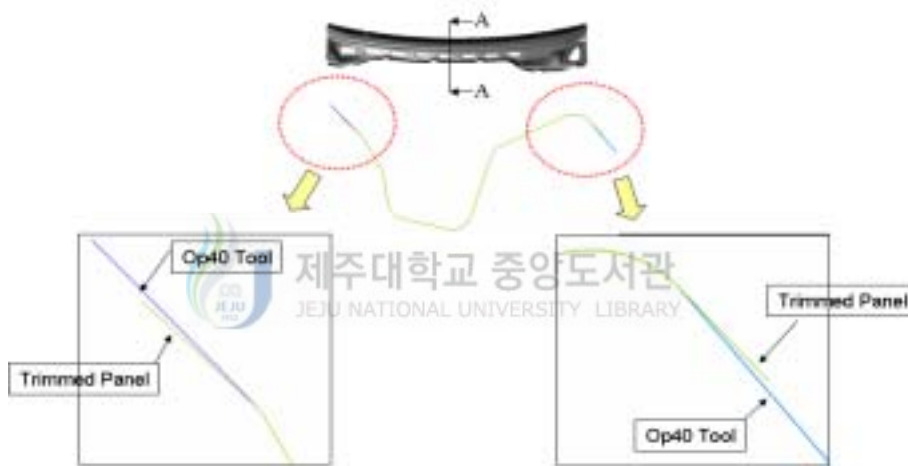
UP/DN flange - section A-A & trim panel and trimming tool
